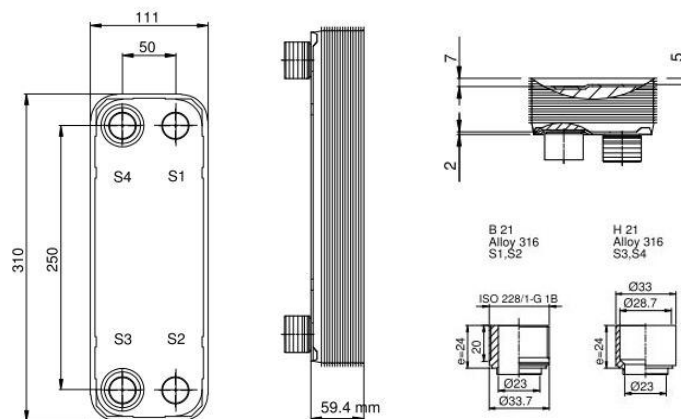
Dimensions of Alfa Nova 27-20H plate heat exchanger
